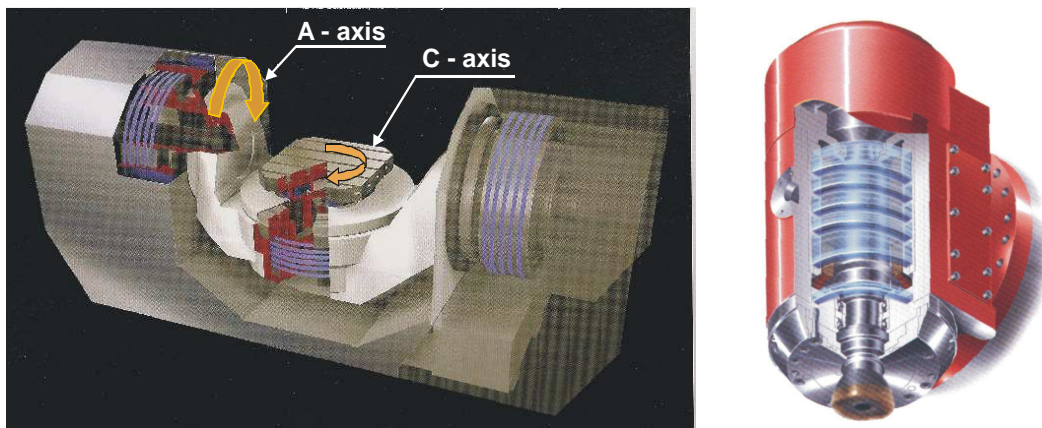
Direct drive of A and C axis with high torque motors and milling spindle unit of turning centre with direct drive of spindle and its axis of rotation
